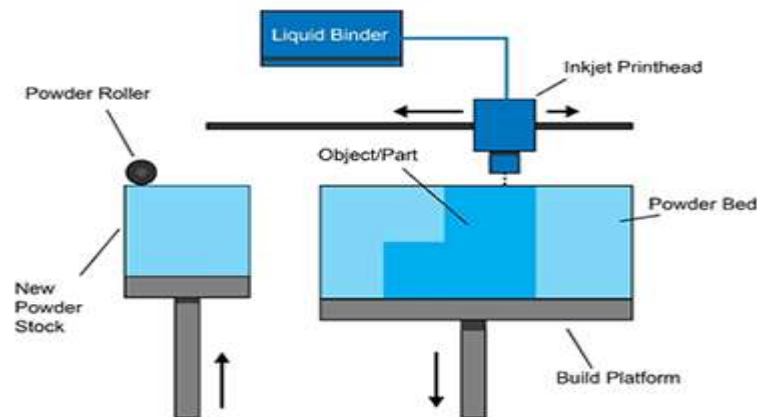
Illustration of Binder Jaetting 3D printing technique [38]
